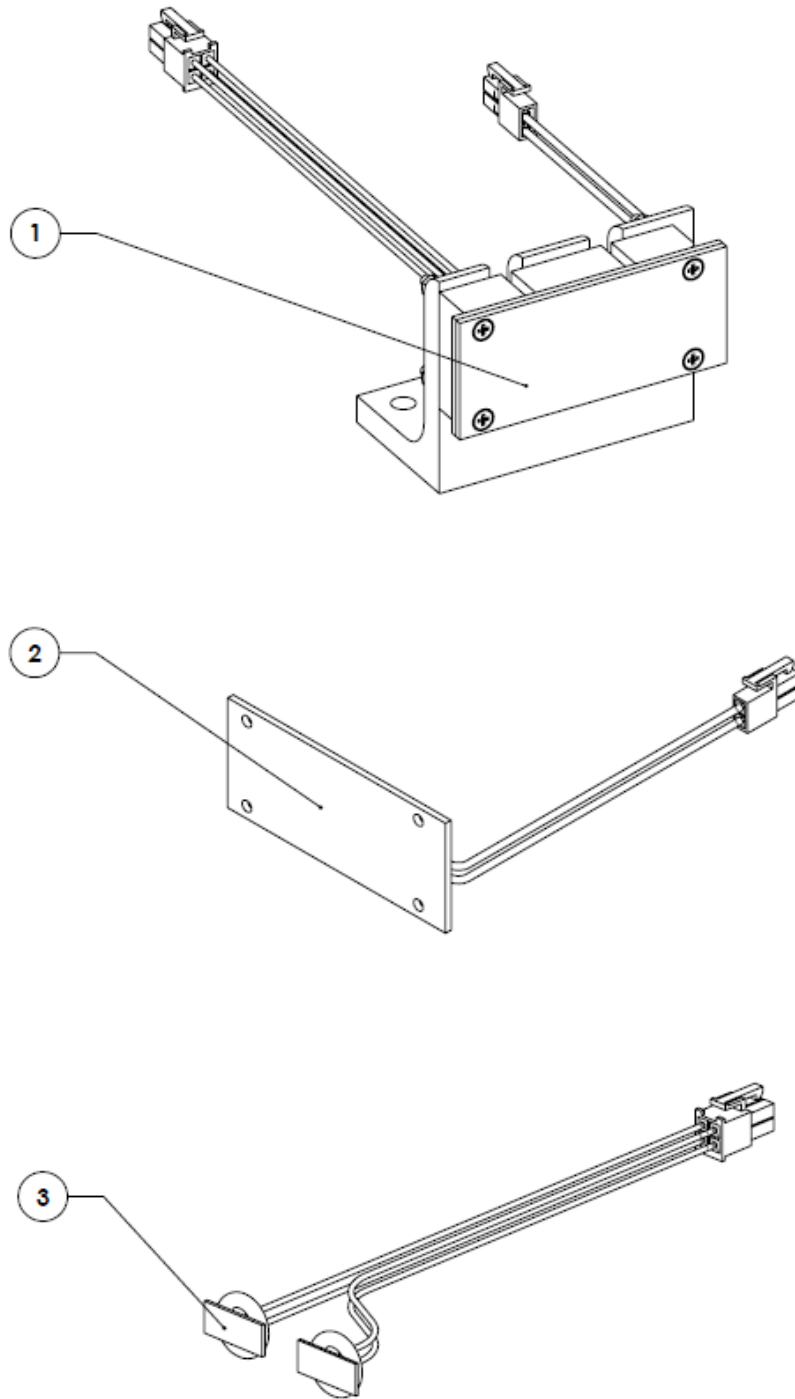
Electrical Chassis Assembly (P/N 47091)
